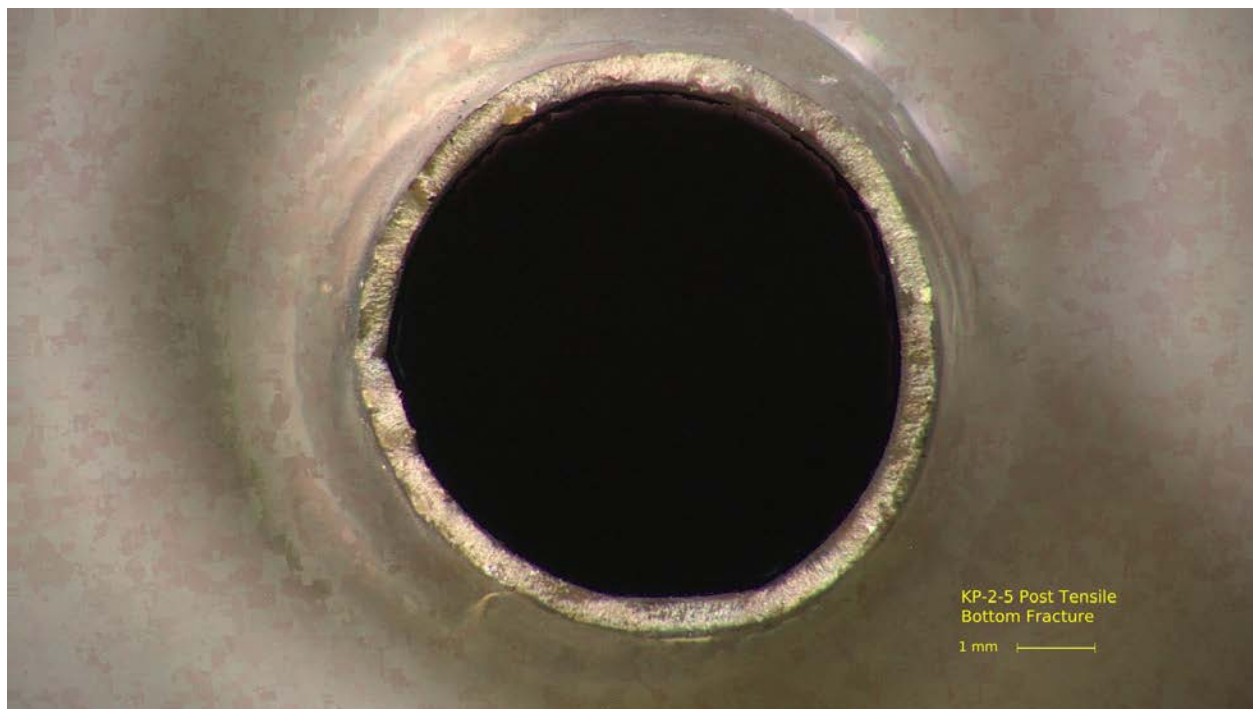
Post-Tensile Image Bottom Fracture for KP-2-5
